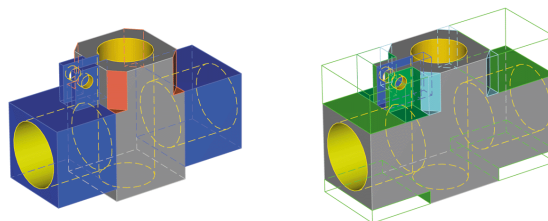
Part detail design view (left) and part manufacturing planning view (right) on a part.
